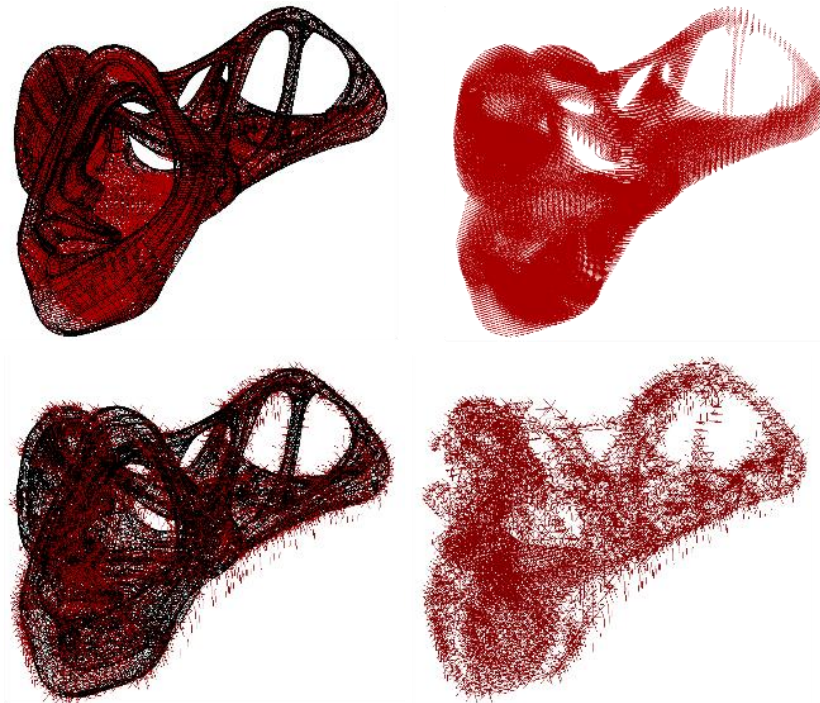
3D view of complex part design result: spiral pattern (above) and optimized infill pattern (below)
